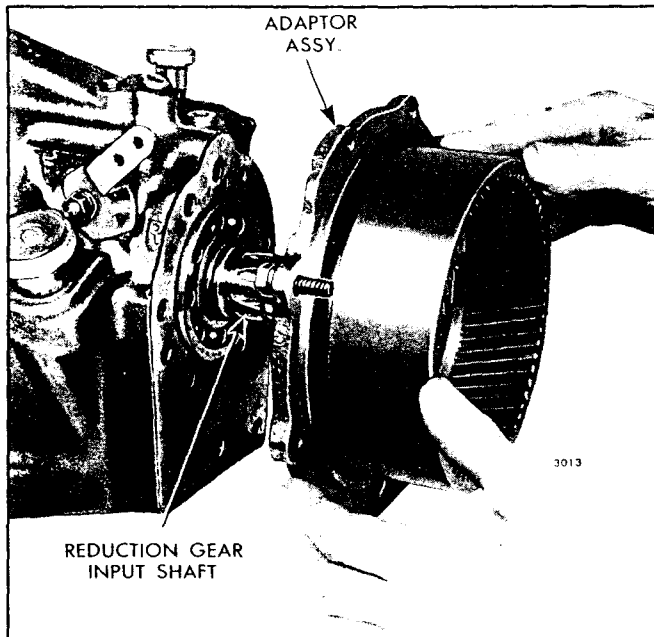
Removing or Installing Reduction Gear Adaptor, Planetary Ring Gear Plate and Ring Gear Assembly from/to Reverse Gear Housing (2.5:1 and 3:1 Ratios)
